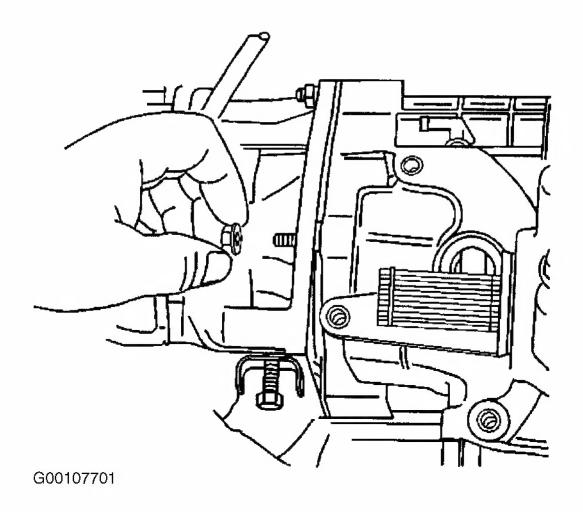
Removing Transfer Case Adapter Retaining Nuts Courtesy of GENERAL MOTORS CORP.
